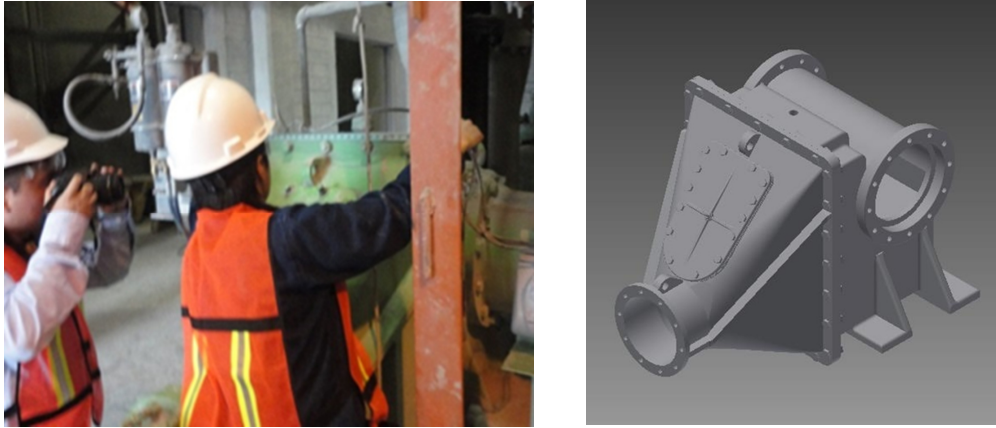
(a) Measurement of the parts and tools; (b) 3D model
